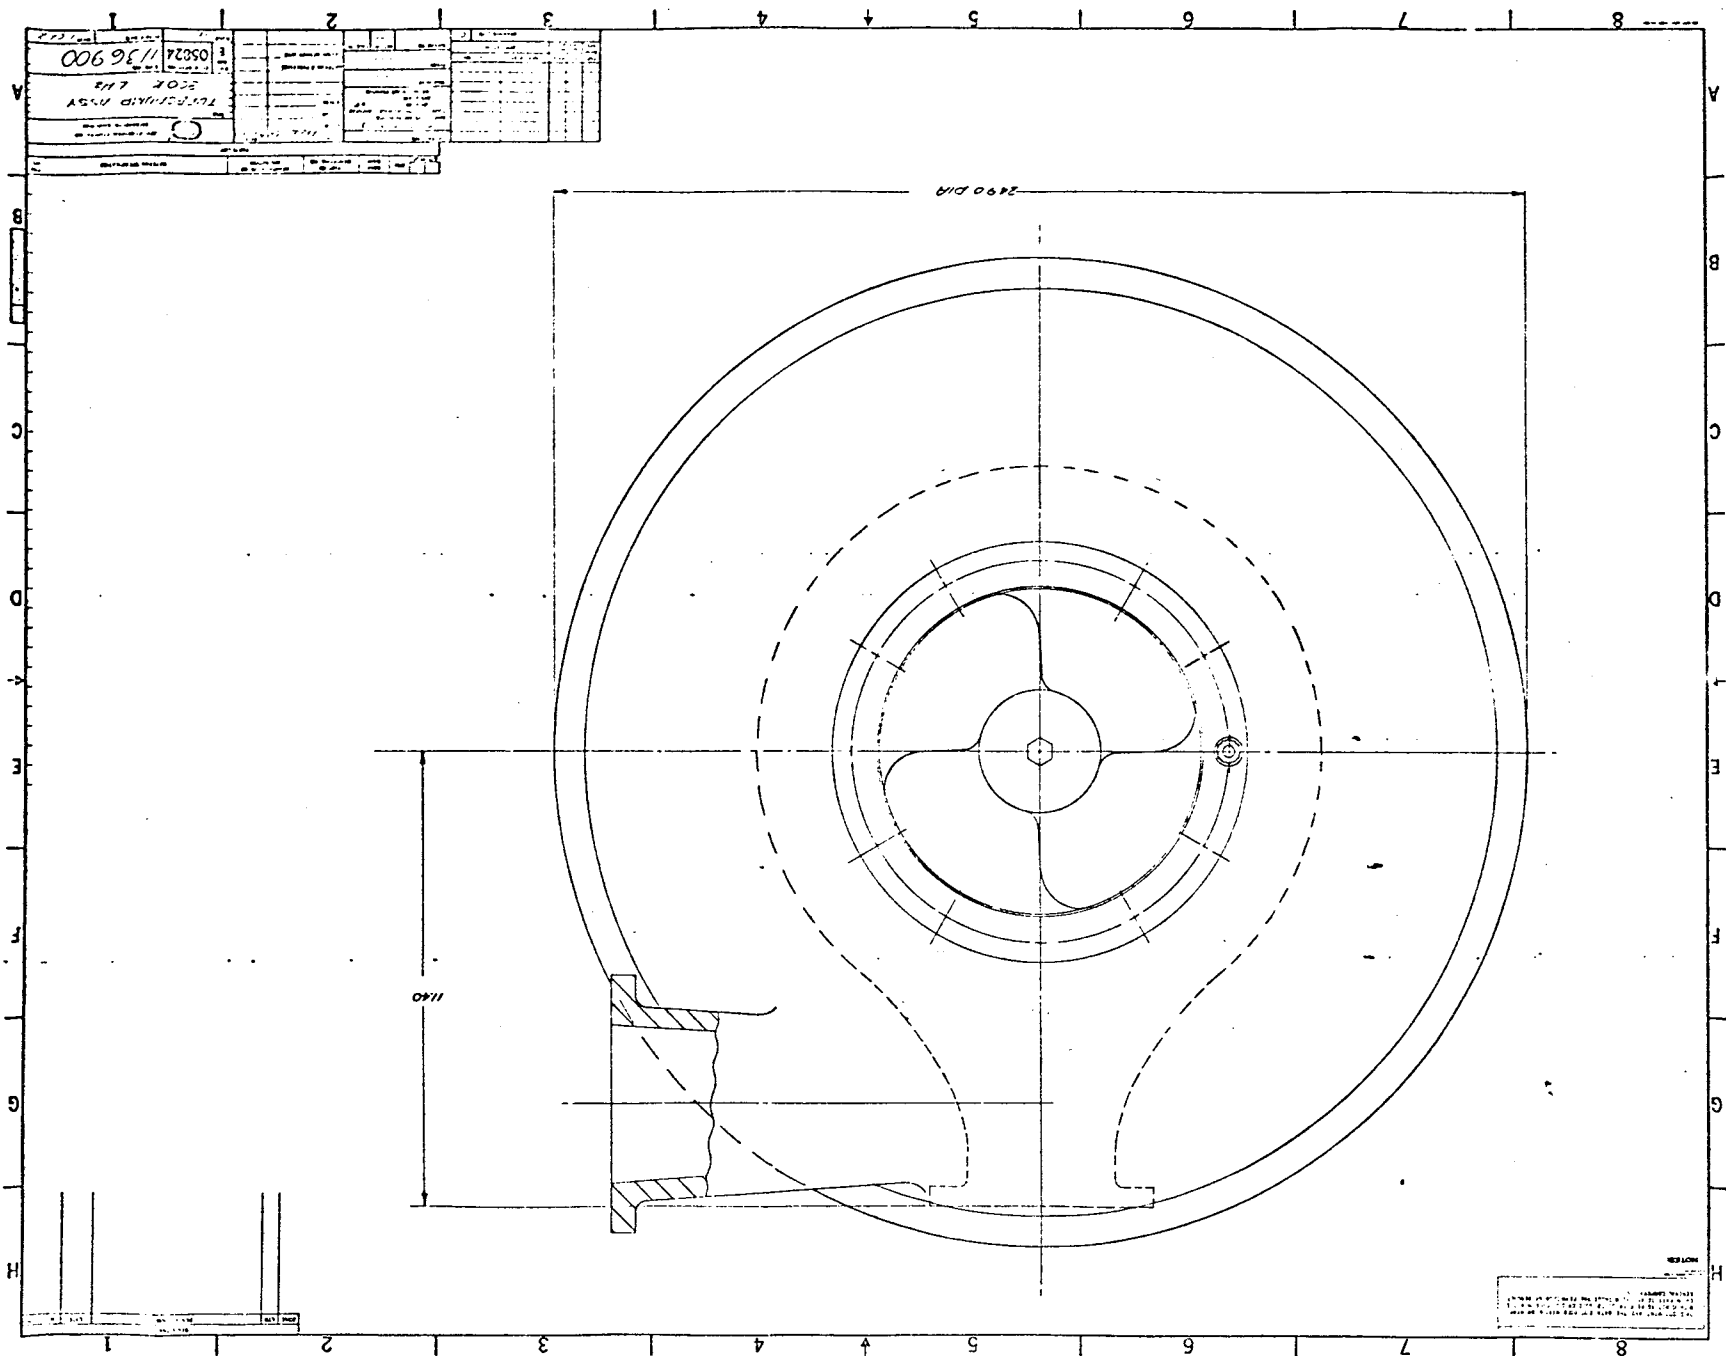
LH₂ Turbopump Assembly (Sheet 2 of 2)
